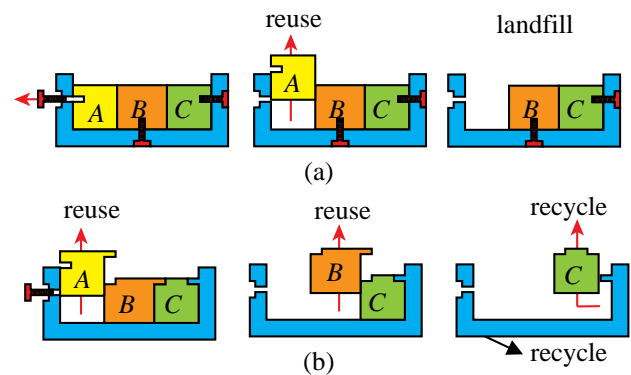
(a) Conventional assembly (b) assembly with embedded disassembly.
